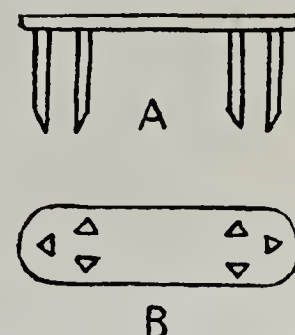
Bone plate for use in fractures close to joints or epiphyses: A, side view; B, bottom view.
